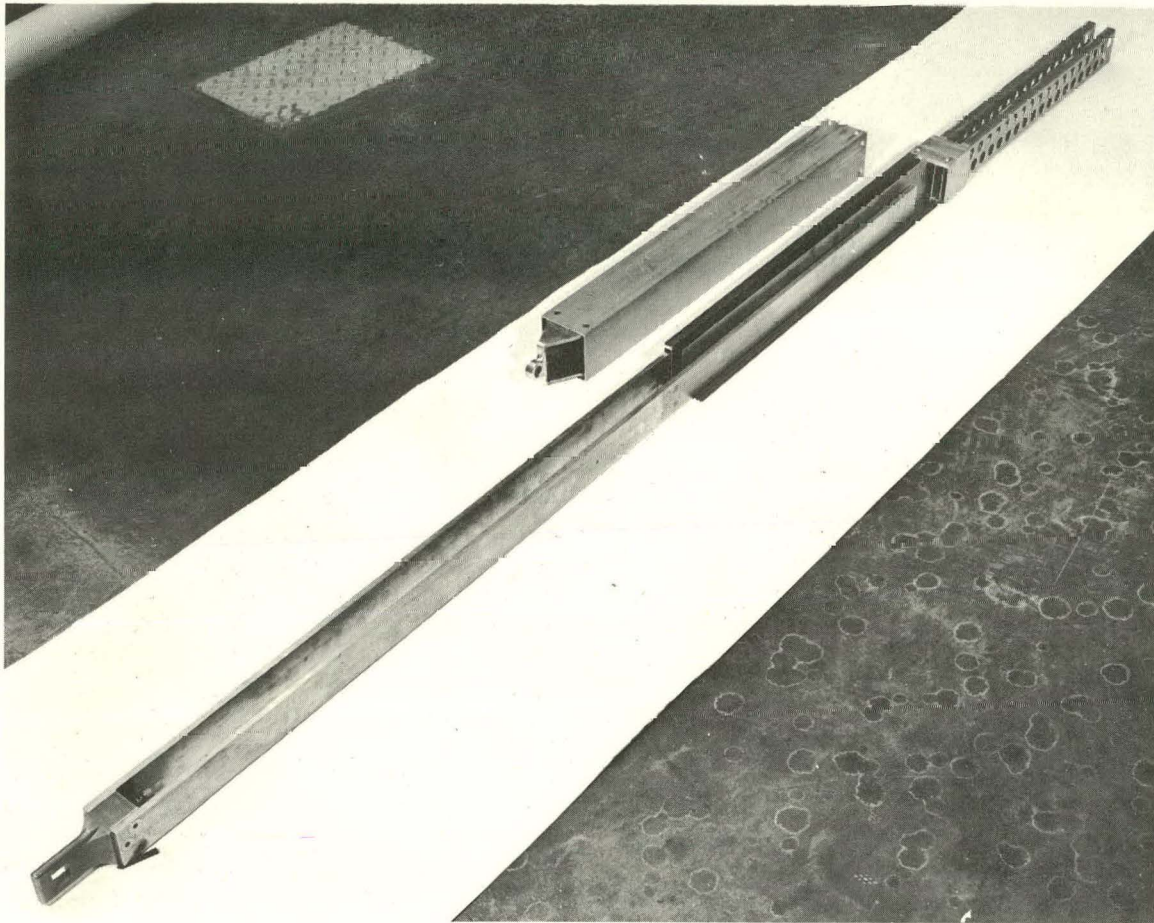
Photograph of control rod assembly (NRTS-61-7269).
